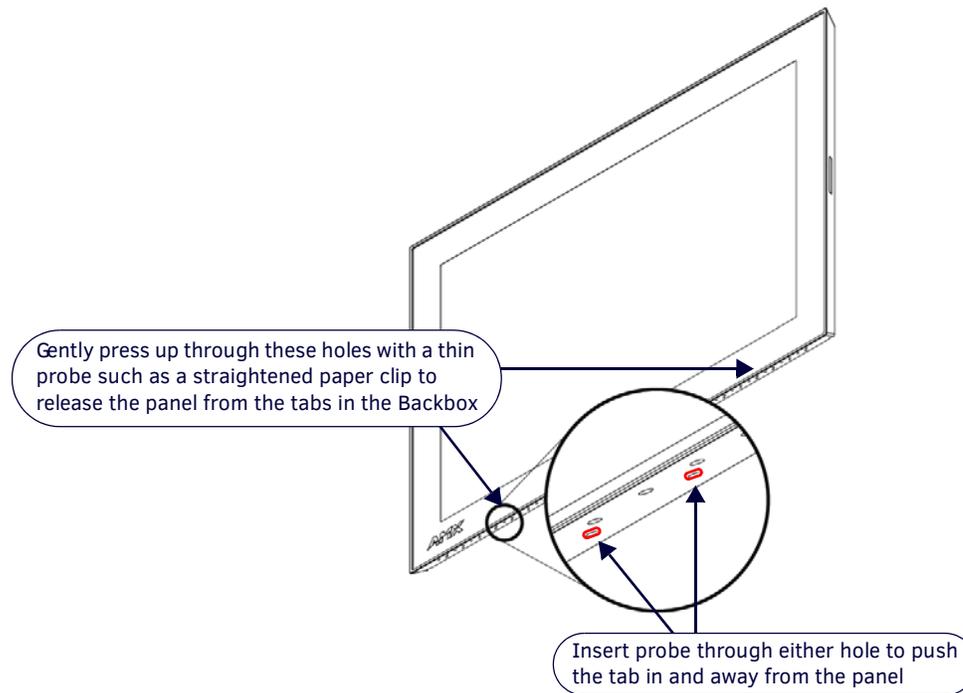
MSD-1001-L/2 BACKBOX ASSEMBLY
